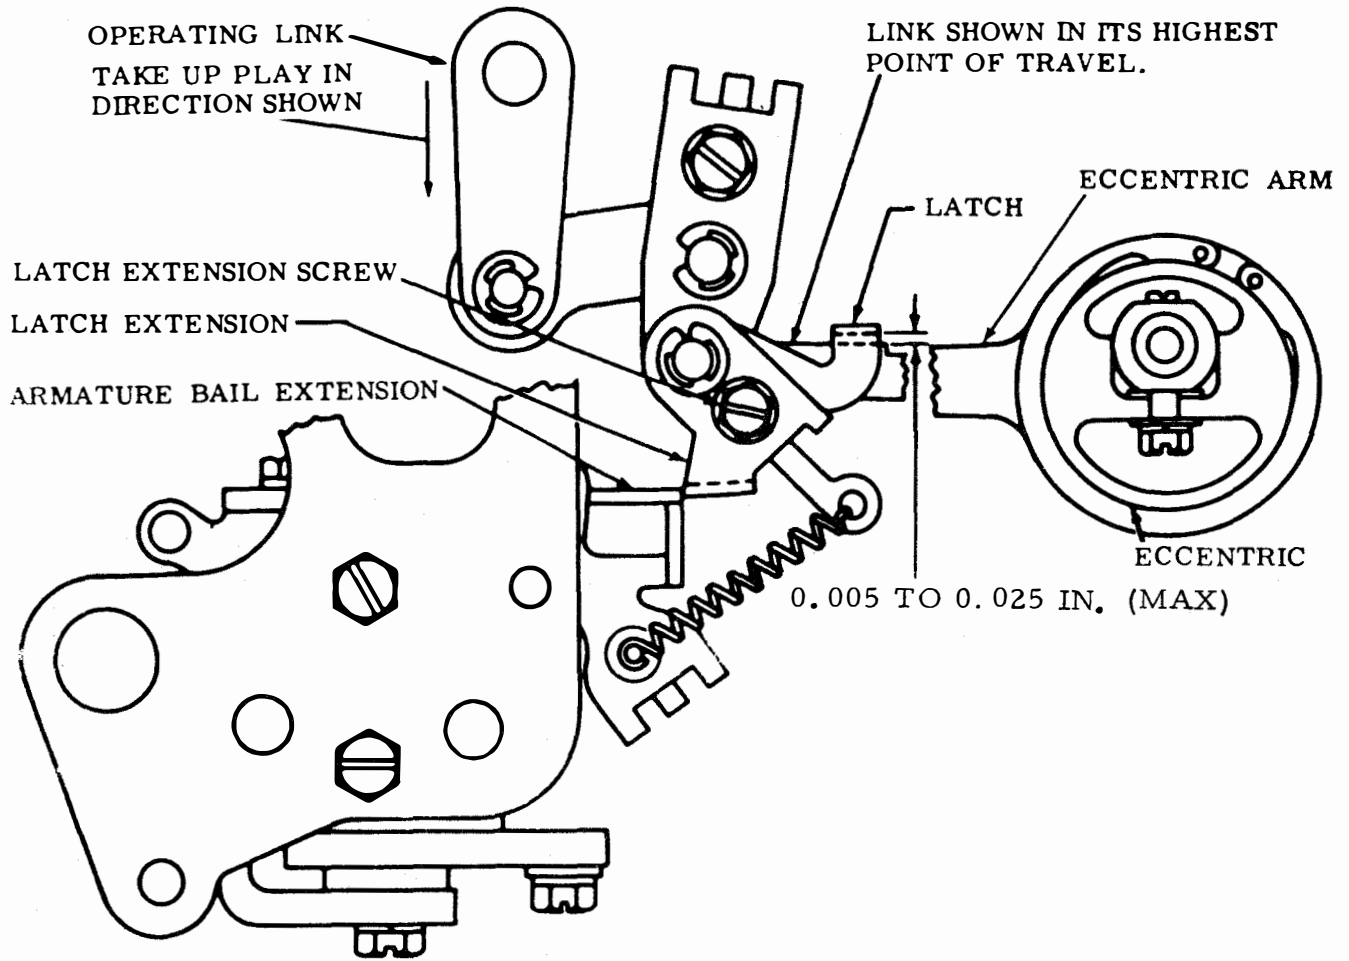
Power Drive Backspace Mechanism Latch, Reperforator
